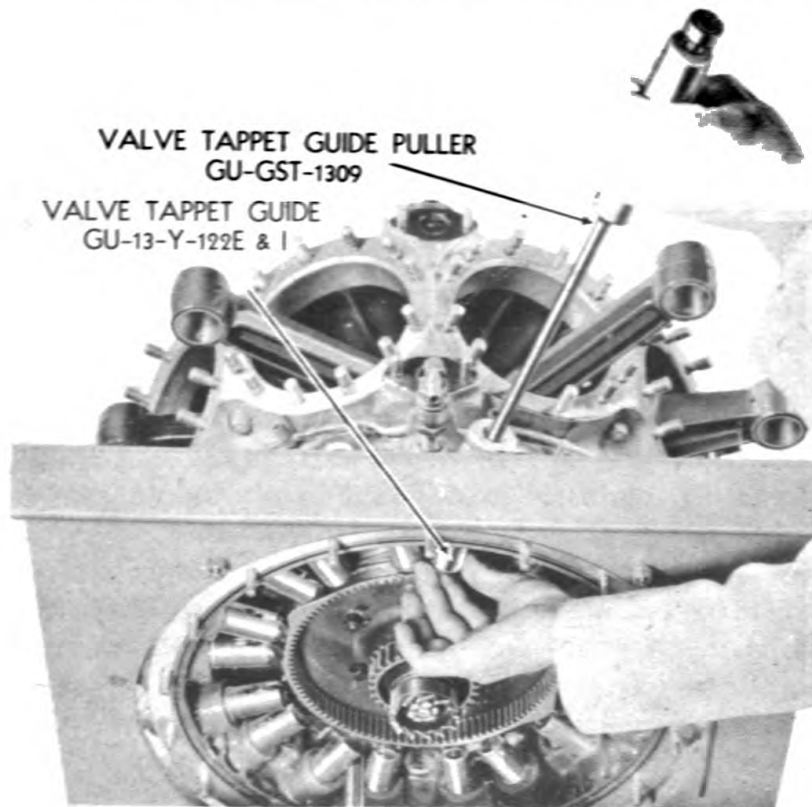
Removing valve tappet and guide. RA PD 6564
